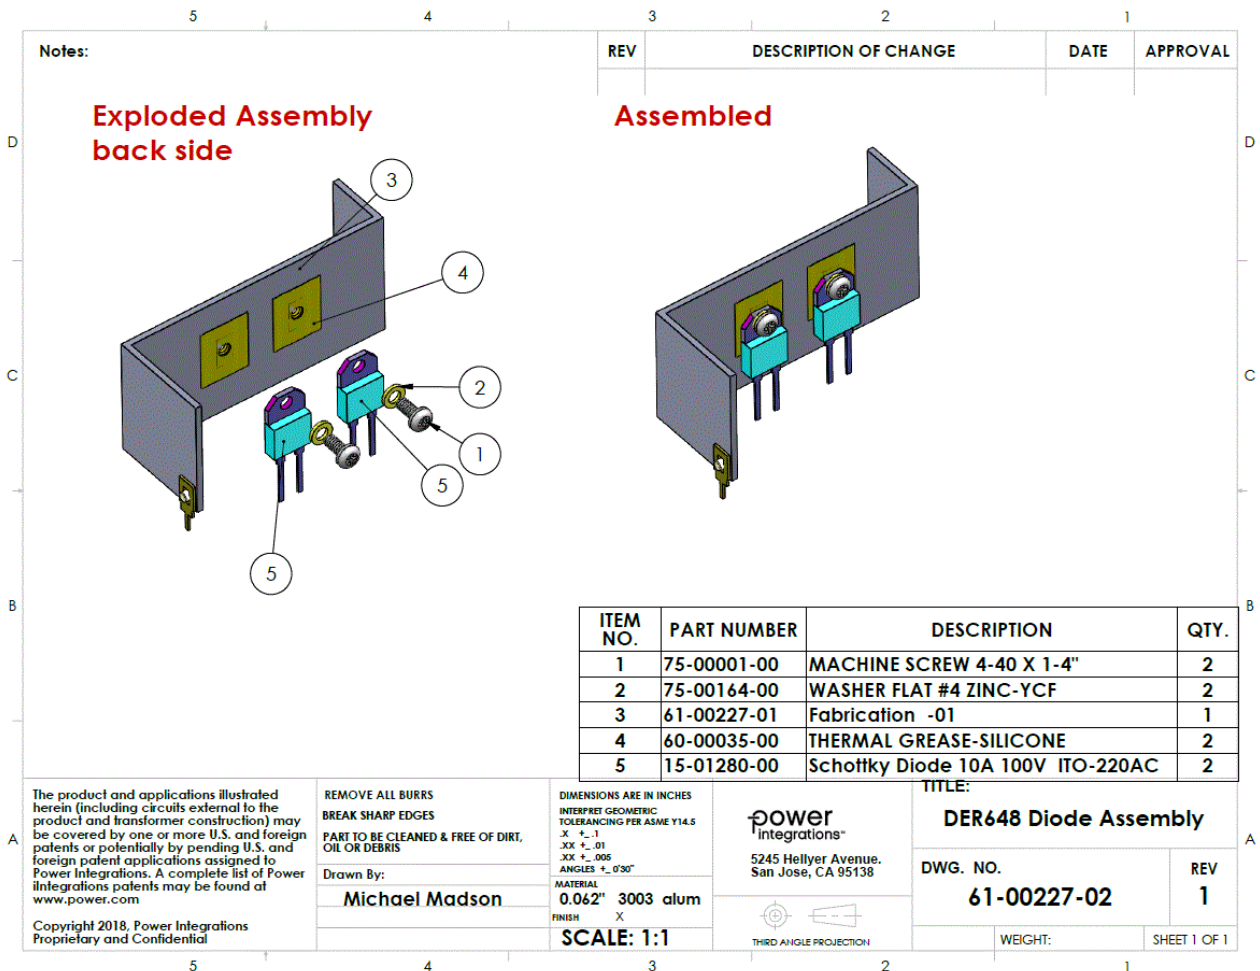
DER-648 Secondary Heat Sink Assembly.
